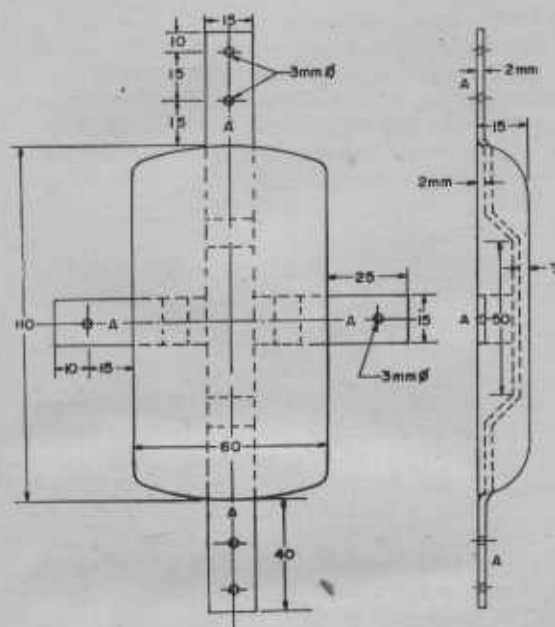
Anode type 2. Ternary aluminium alloy anode. All dimensions in mm. A - mild steel insert
